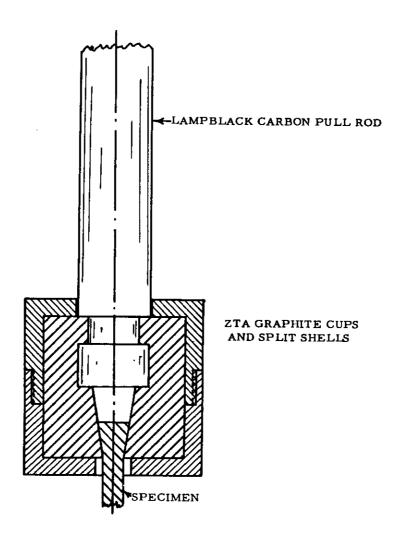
Sketch of Initial Design of Grips and Pull Rods Used for First High-Temperature Tensile Tests
